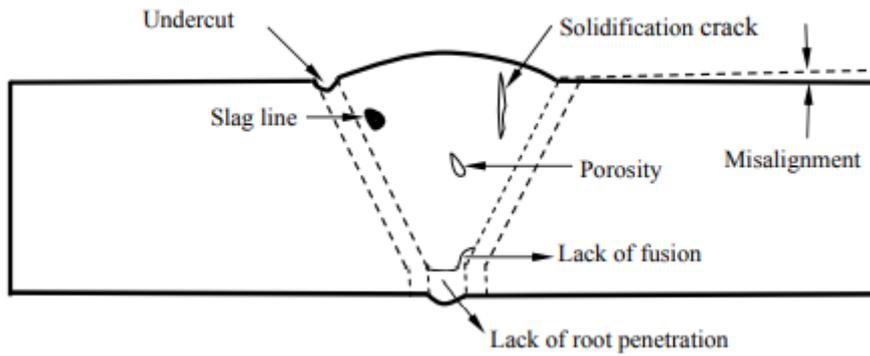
Various weld imperfections in butt weld joints (Alam, 2005).
